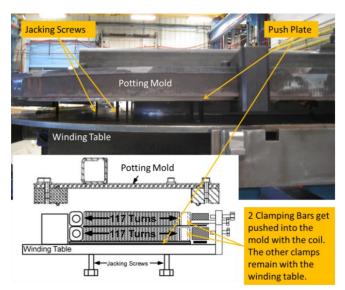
Schematic of the coil before pushing into the potting mold and a picture with the coil after being pushed completely into the potting mold.
